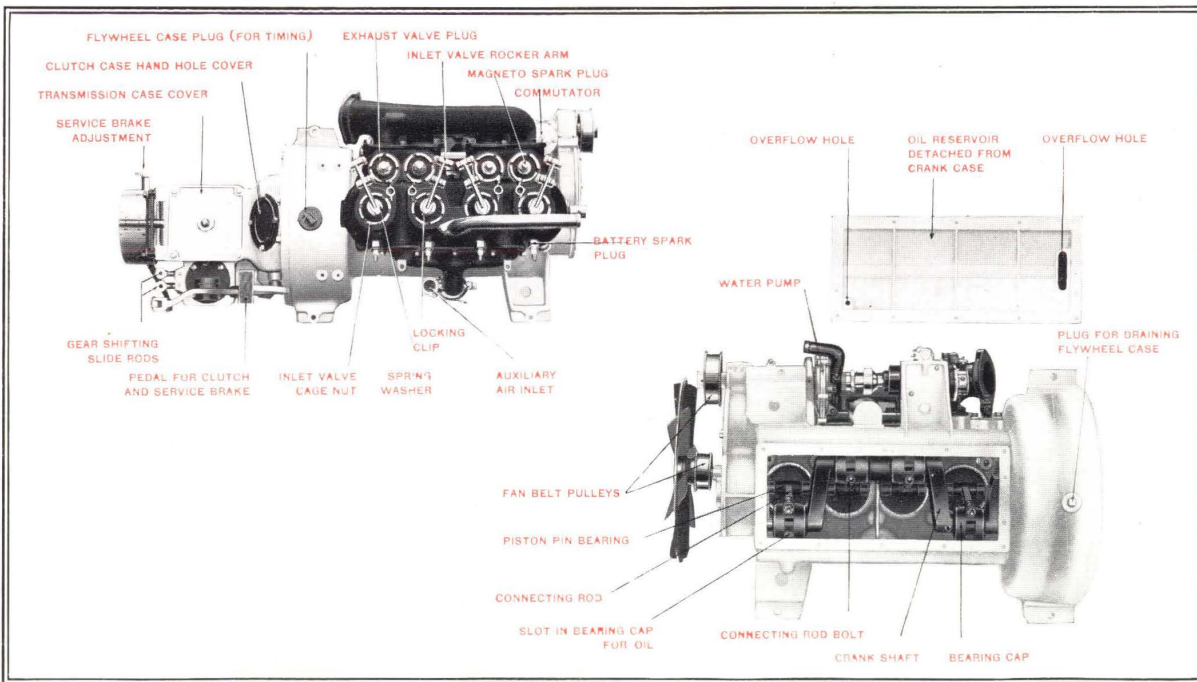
Top and Bottom Views of Chalmers "30" Motor
